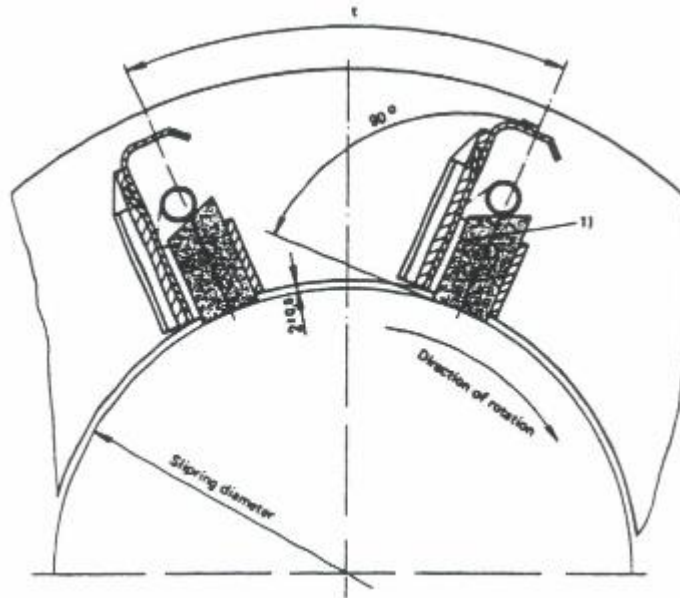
Positioning of Carbon Brushes on Sliprings
